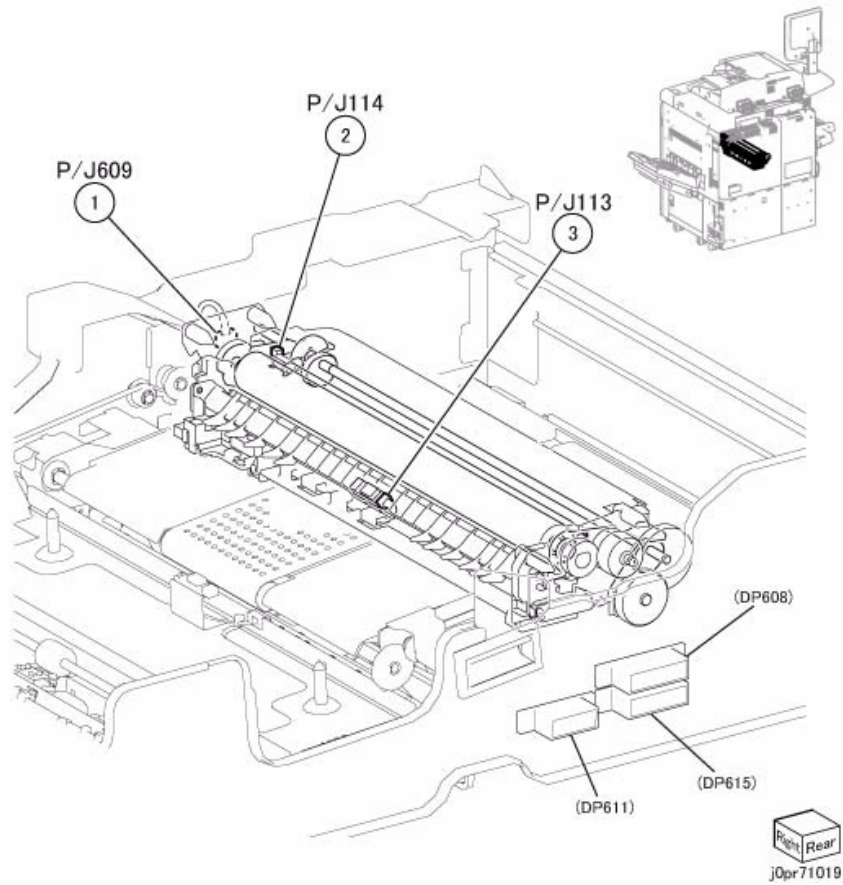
2ND BTR ASSEMBLY (j0pr71019)
